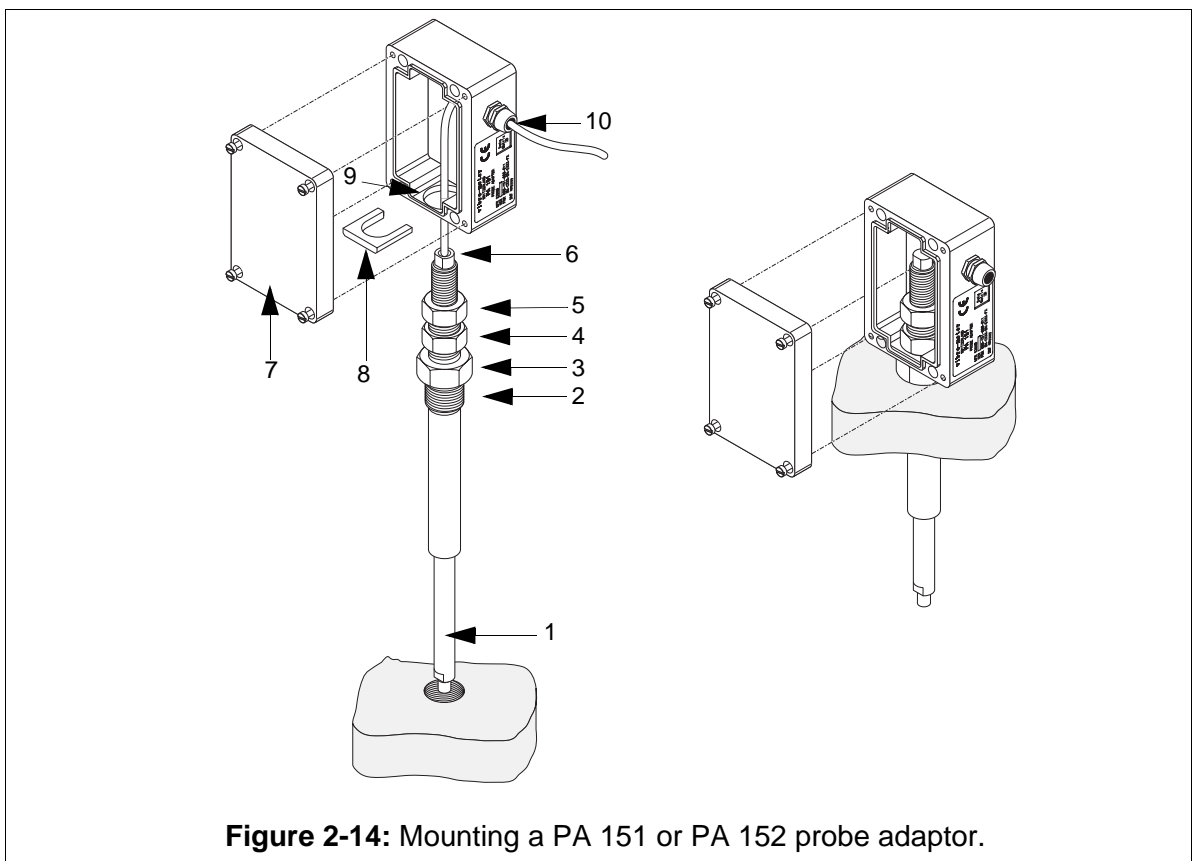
Mounting a PA 151 or PA 152 probe adaptor.
